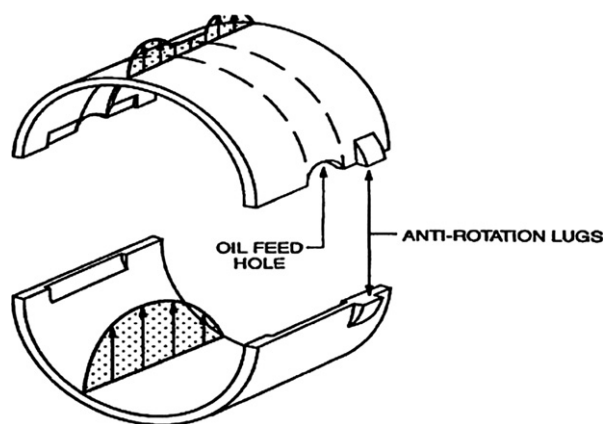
• Straight sleeve bearing liner (Courtesy of Elliott Co.)
